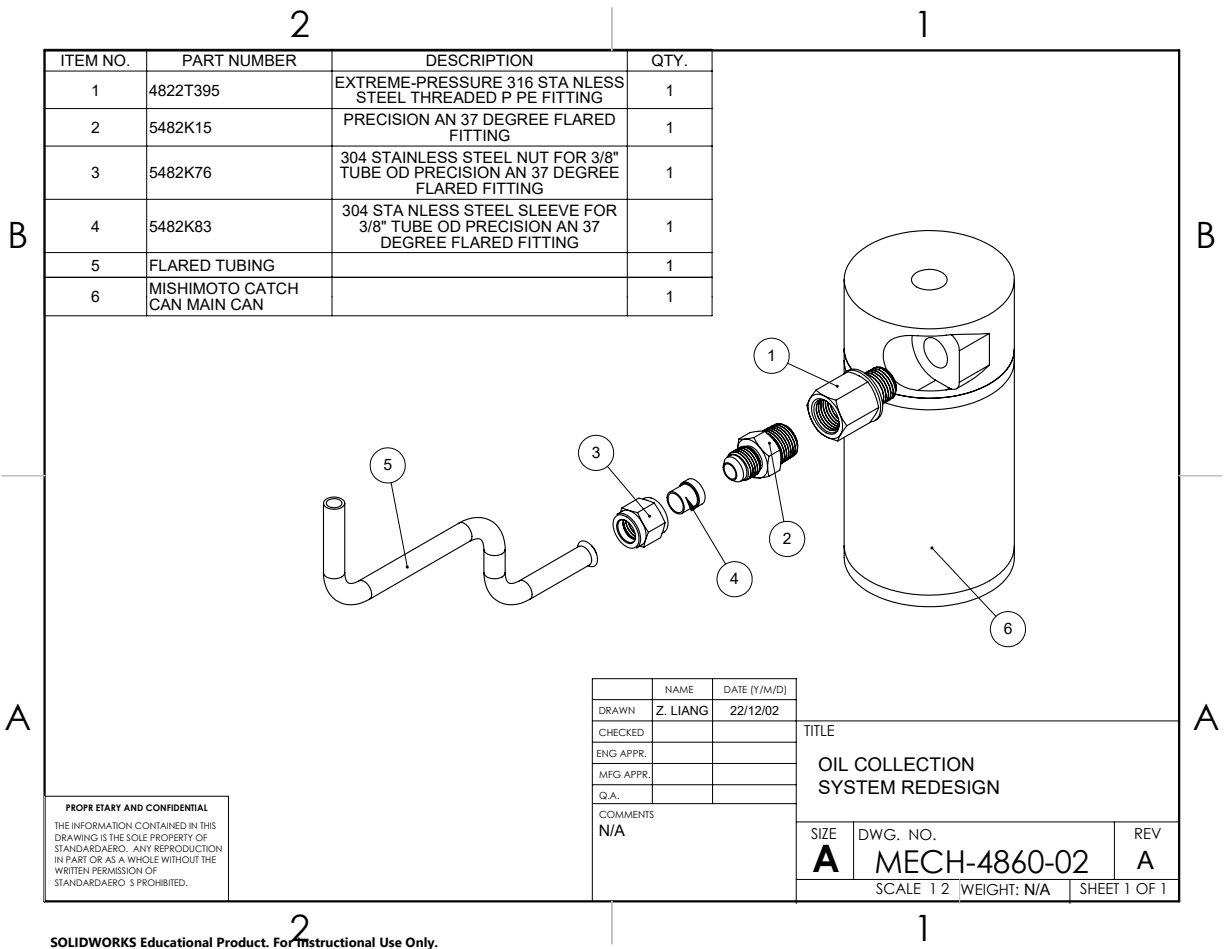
Final Oil Collection System Assembly and Bill of Material.[1] [2] [3] [4]
